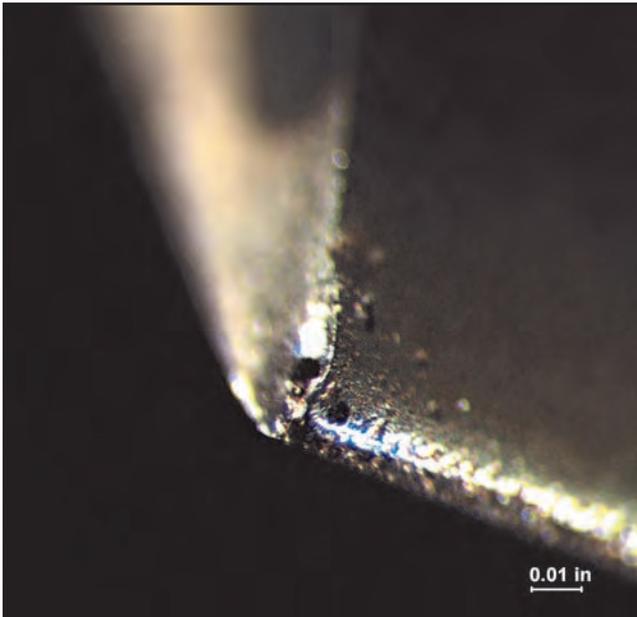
Leading edge pitting from airborne chlorides and adjacent fracture surface on GE 7FA vane.
